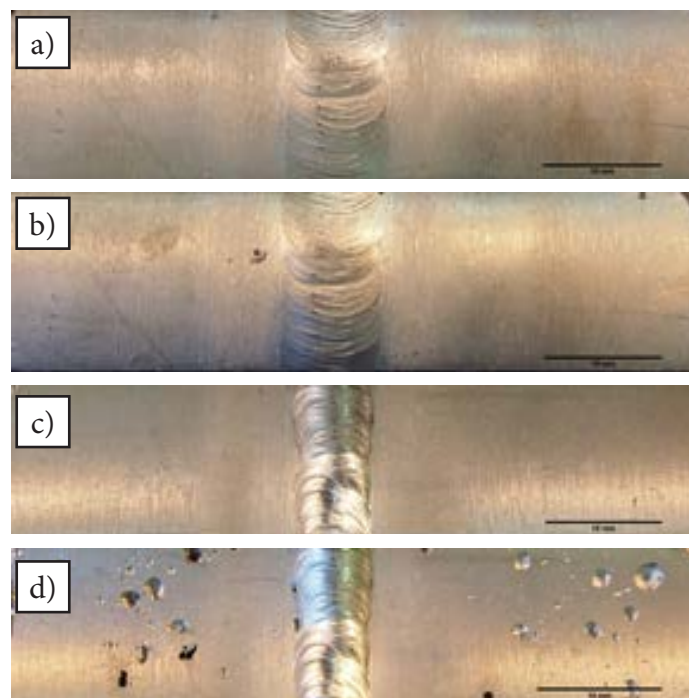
Specimen no. 1, where temper colours were removed through cleaning and passivation: a) weld face before the corrosion resistance test, b) weld face after the corrosion resistance test, c) weld root before the corrosion resistance test, d) weld root after the corrosion resistance test
